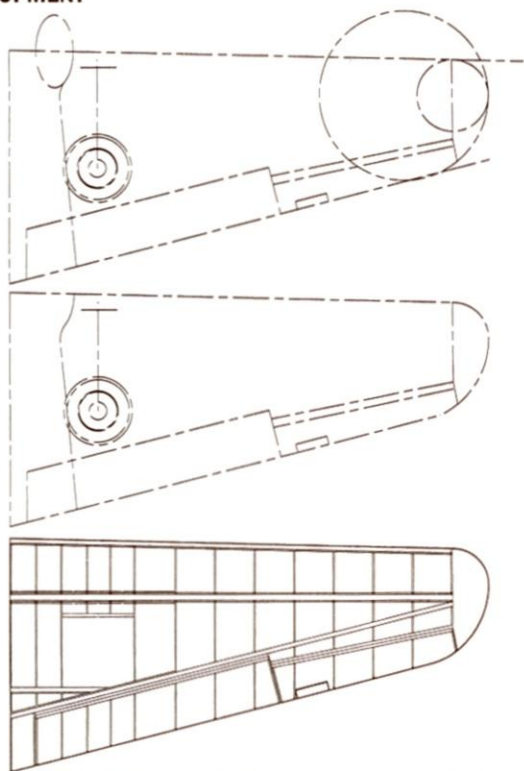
In this wing-development drawing, you can see the three basic steps. First you trace your drawing using basic geometry, and then you delete unwanted segments, and finally, you add the internal details. Everything is done in full-size.
